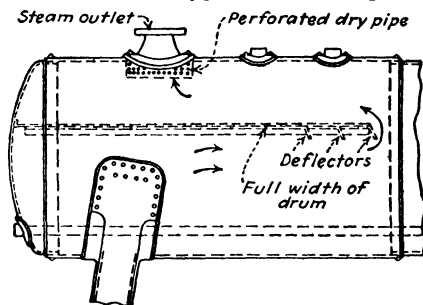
Baffle and dry pipe in a box-header longitudinal-drum boiler.
